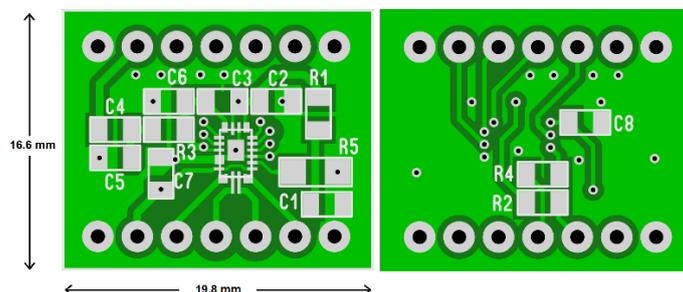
Test PCB without Output Filter. Top – Left, Bottom – Right
